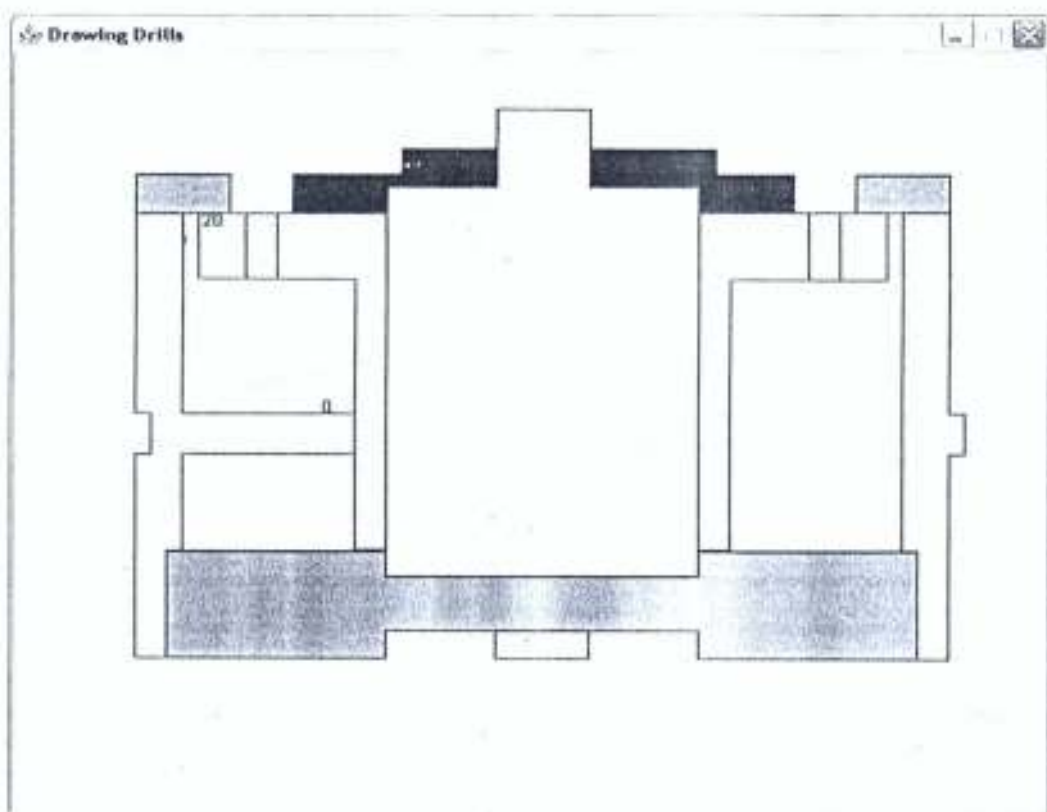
(ix): Complete Jigs and Fixtures Design for drilling the work.
